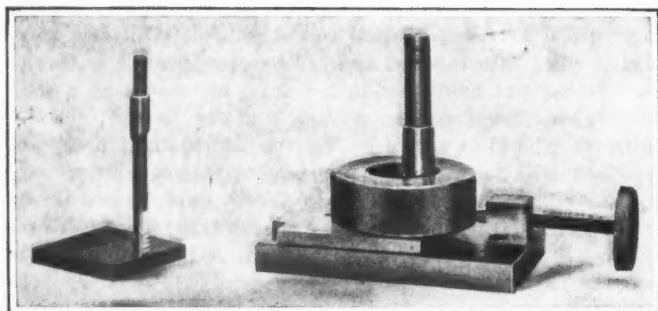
Apparatus to take True Casts of Ring Screw Gages
